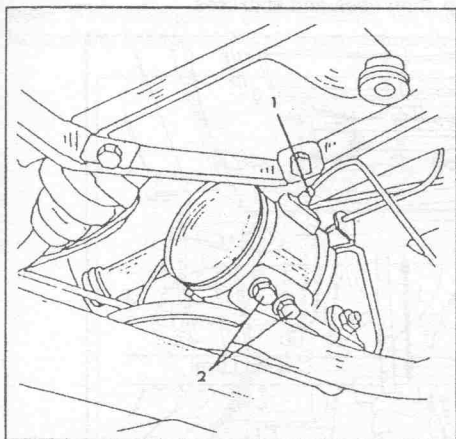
Details for the removal and installation of a front height corrector.
